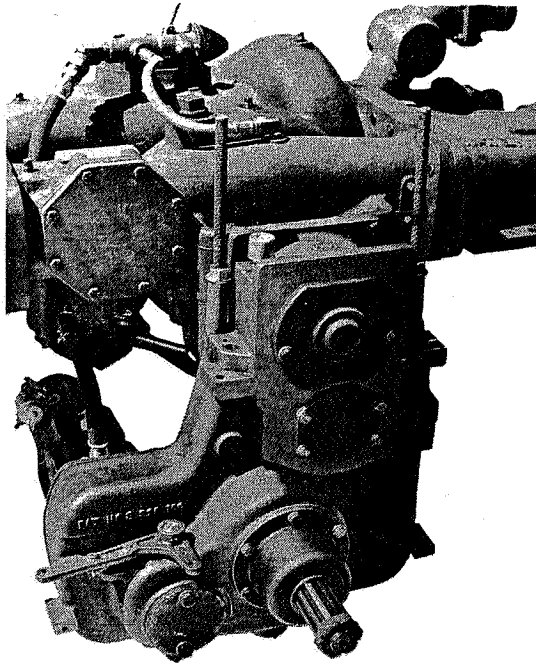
Threaded Rods Installed for Removing M Series Transmission
